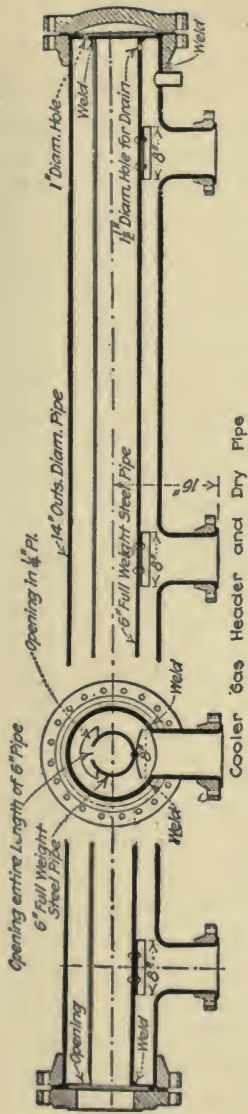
An example of welded pipe headers. A special design made in the Quincy Market Warehouse and Cold Storage Co.
